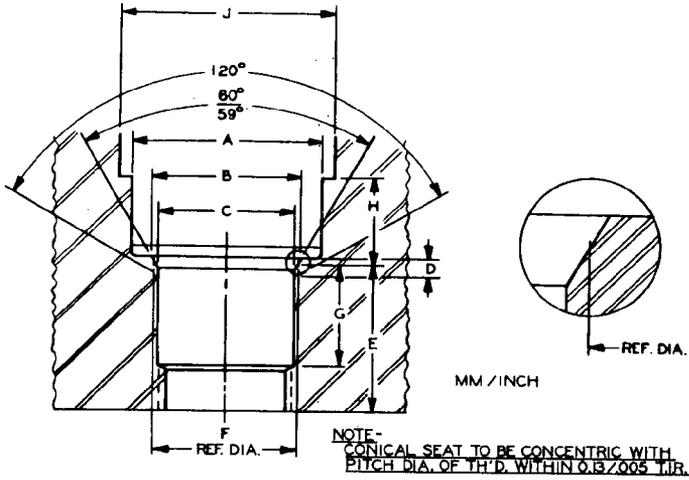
HEAD COUNTERBORE—CONICAL SEAT (SEE TABLE 4)
